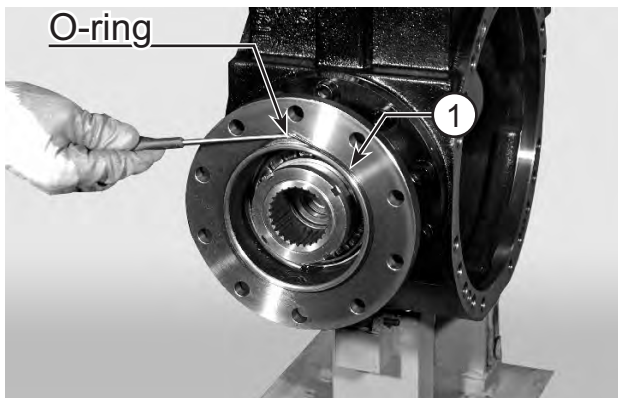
Install a new seal-ring (1). Lubricate the seal ring before fitting.
